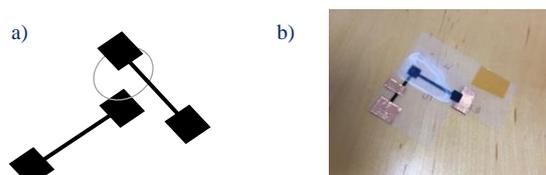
a) Exploded view of low-pass filter inkjet printer design, with egg white drop cast, b) Complete inkjet printed low-pass filter on PET
